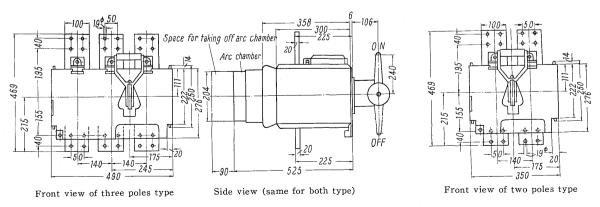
Outline drawing of air circuit breaker, type RF 913-3,000
